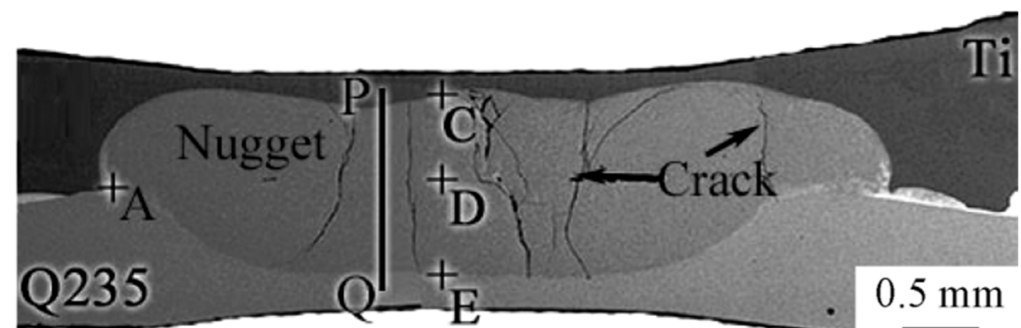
Morphology of Ti/Cu/Q235 spot welding joint—Reprinted from Ref. [58]. 2021 Transactions of Materials and Heat Treatment.
